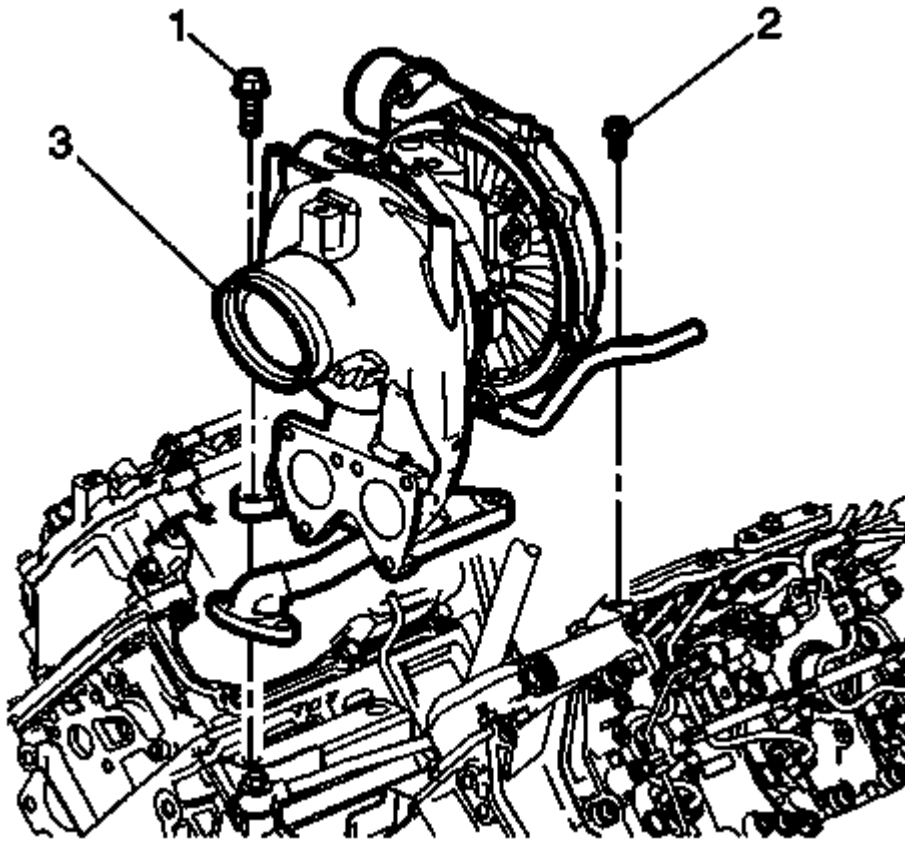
Turbocharger, Mounting Bolts And Turbocharger Cooling Return Pipe Bolt
